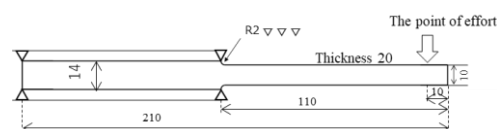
Specimen geometries used for the low cycle bending fatigue test (unit:mm).
